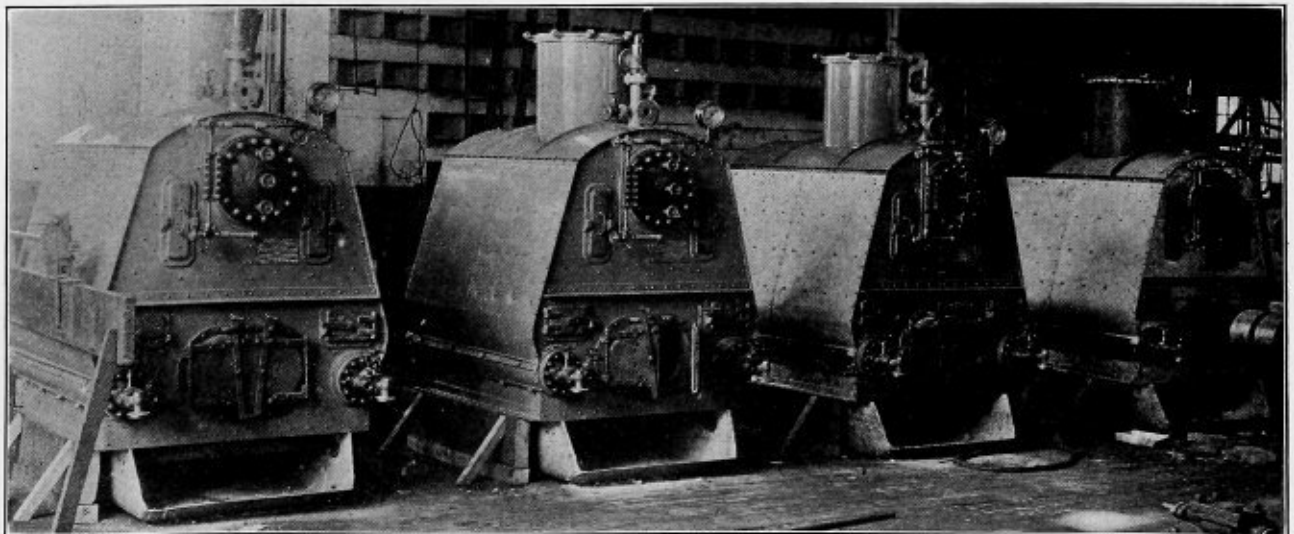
Four of New Type Navy Boilers Complete, With Casings and Fittings
